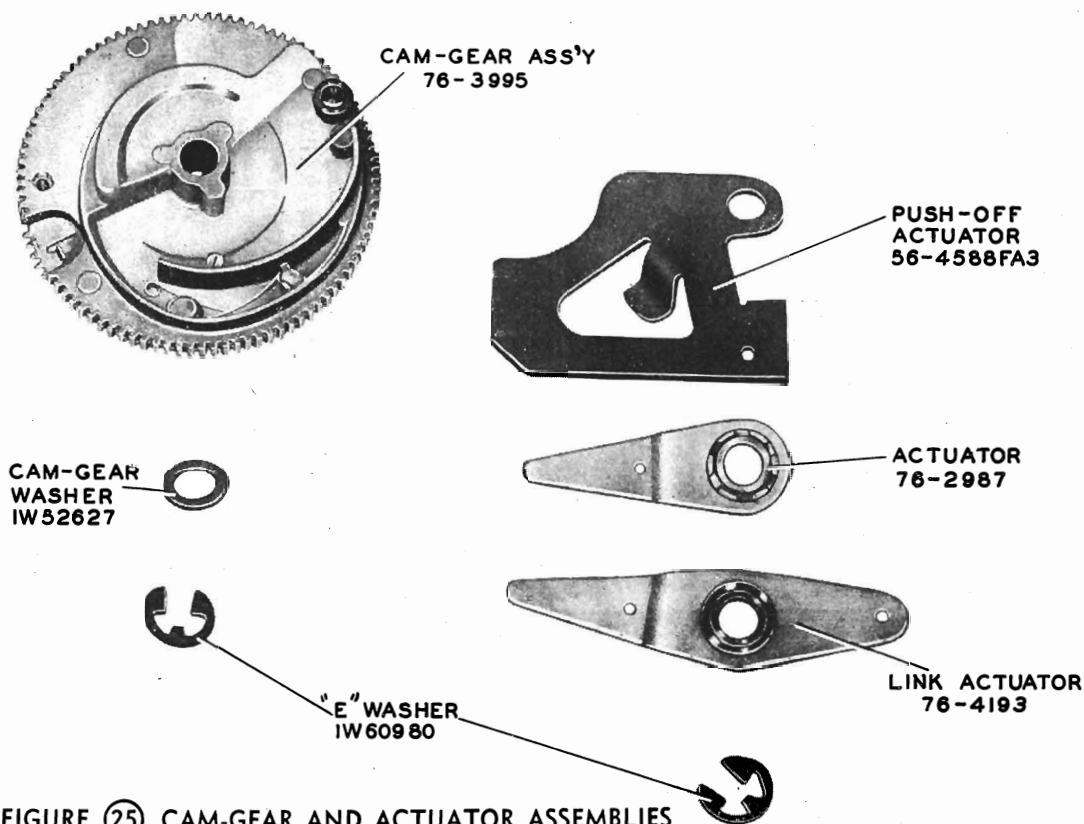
CAM-GEAR AND ACTUATOR ASSEMBLIES
